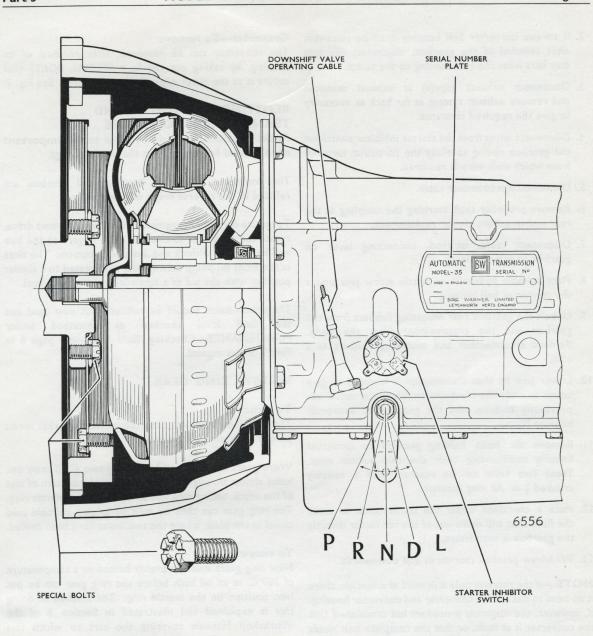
Converter attachment points to engine drive plate and gearbox external fittings
